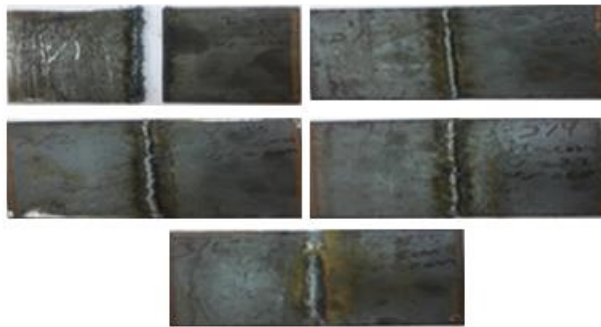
Carbon steel plate welded with 100 Amp, 10 l/min CO₂ flow rate, wire welding speed from 8.5 m/min and different voltage from 11 to 26.5 volt
